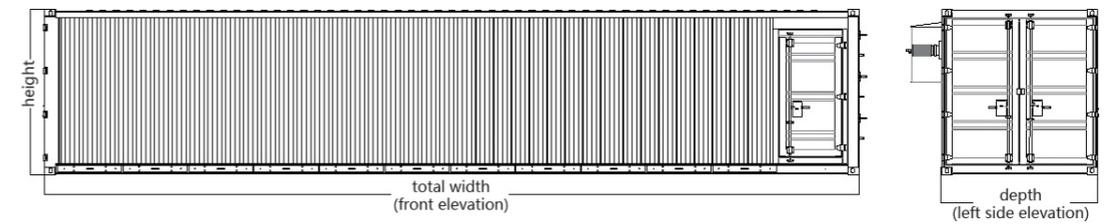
Dimensional Drawing of G31-35kV-Outdoor-Air Cooling FGSVG-C12.0/35-O
